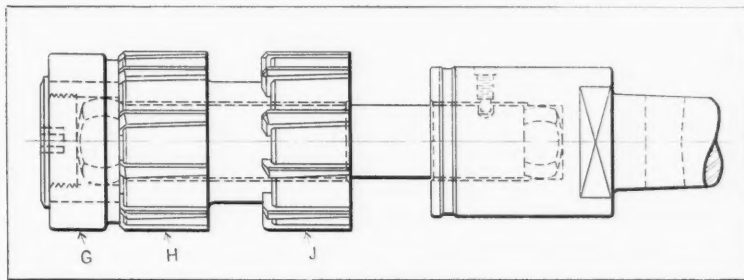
Tool Assembly Used for Semi-finish-reaming Bores a of the Axle Drive-pinion Carrier
